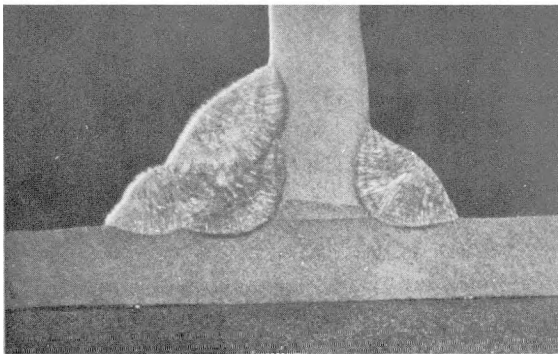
Typical appearance of fillet welds made in the overhead position. Composition A electrode.
